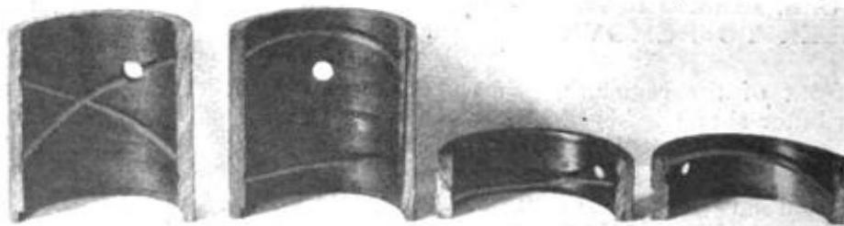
The Expansion Plug and Center Bushing Cut in Two to Show Oil Grooves and Relation of Oil and Screw Holes to One Another.
